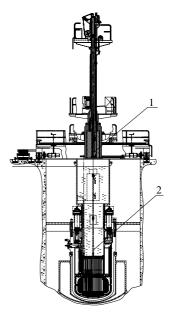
The refueling machine installed on the reactor core for fuel insertion or extraction
